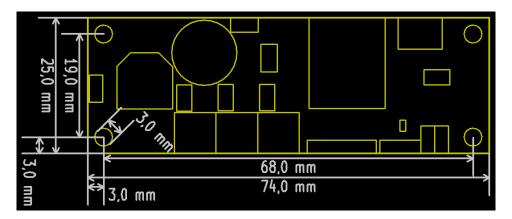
Dimensions associated with Arecorder's PCB board along with outlines of important components on top side.
